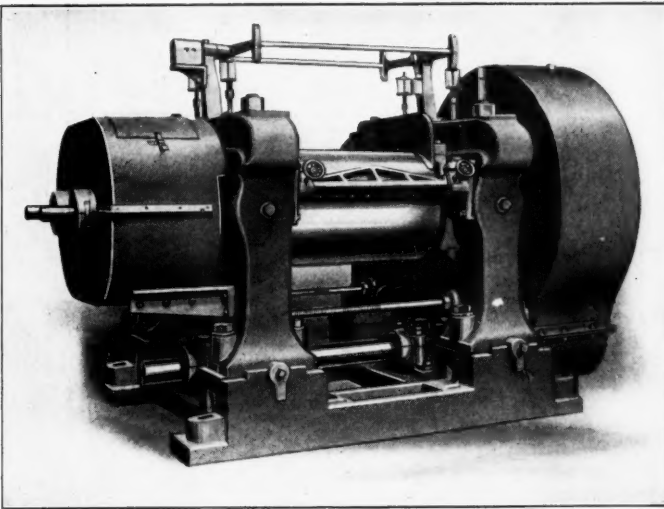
Showing a three roll tire calender, driven by a 100 h.p. motor through an enclosed herringbone gear reduction. All gears on this unit are properly enclosed in dust-proof and oil-tight housings, and are bath lubricated. The reduction gear bearings are also lubricated by the same oil. The roll journal bearings, however, are supplied with oil by a McCord force feed lubricator.
